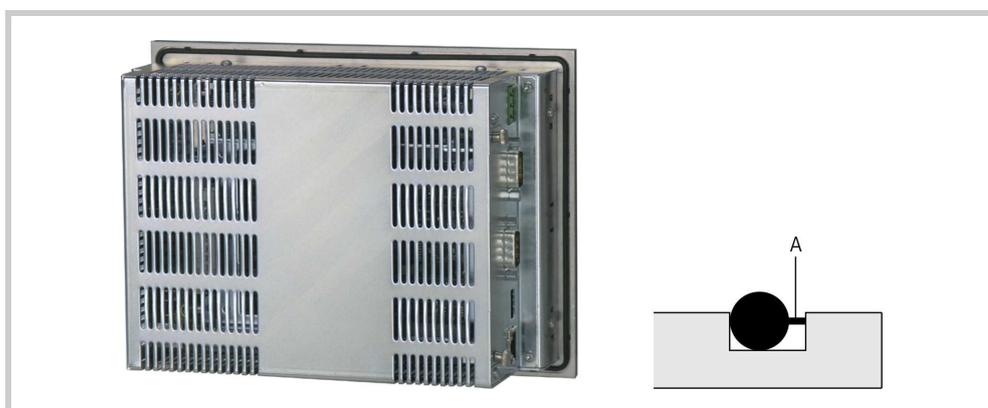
Seal fitted (detail shows optimum position of a securing tab (A))
